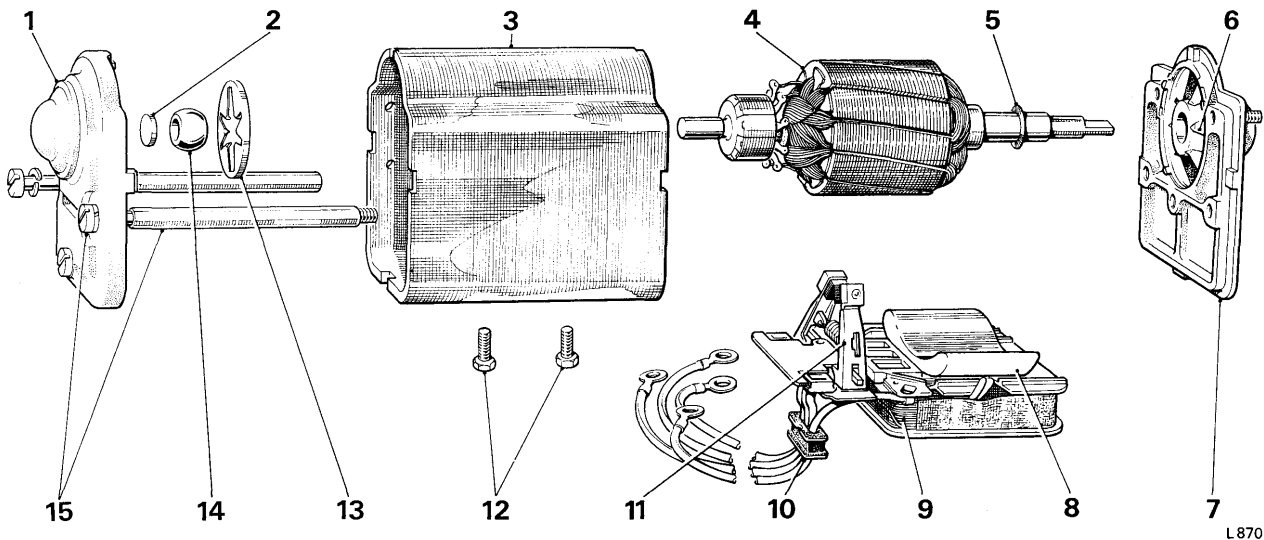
GEARCHANGE ACTUATOR MOTOR
